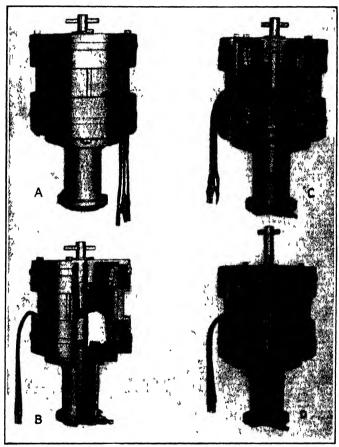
Complete assembly and sections through a non-sealing type polyphase brake magnet.
